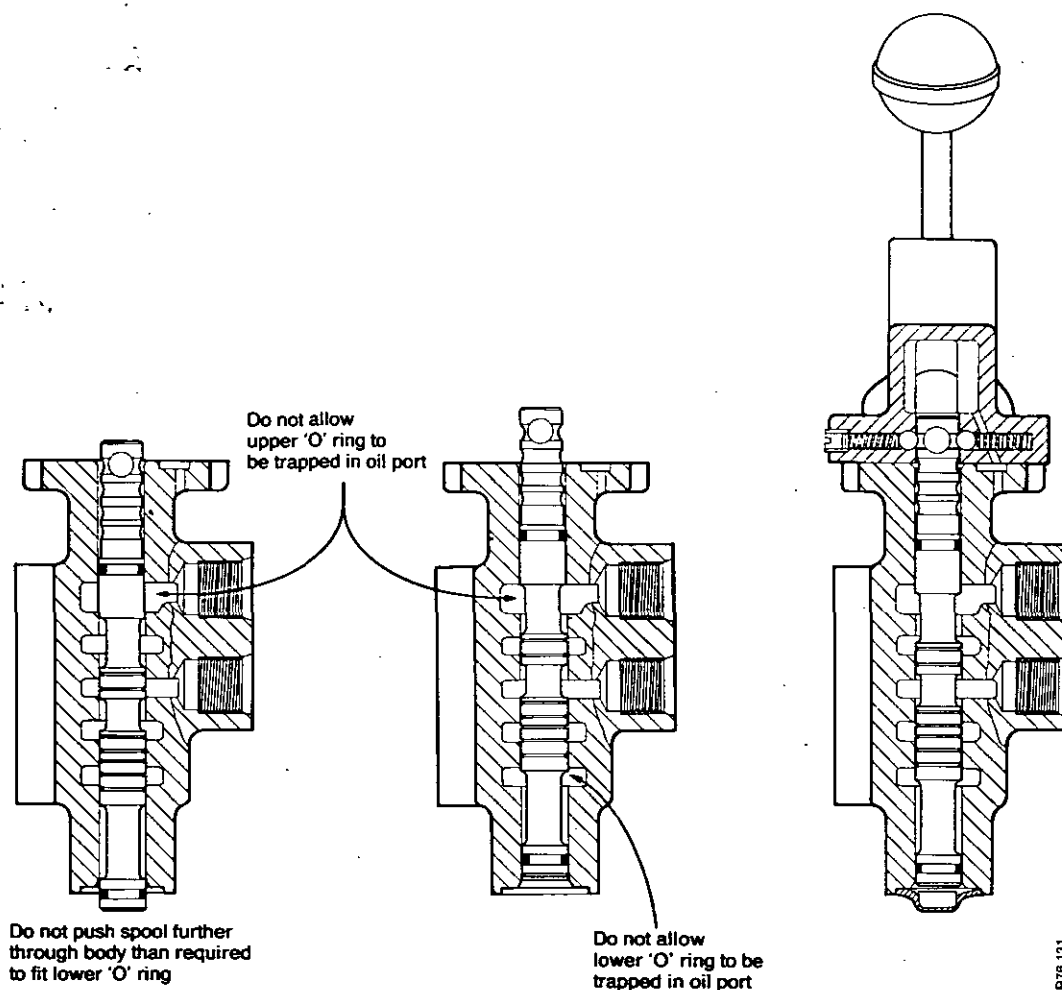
ASSEMBLING THREE-WAY VALVE
